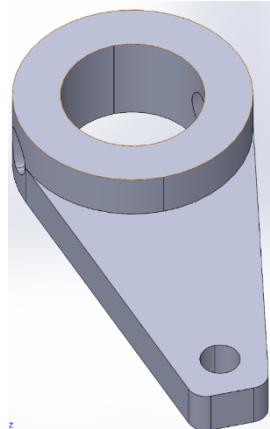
Custom-made "Linkage" to connect shaft rod linkages with connecting rods
